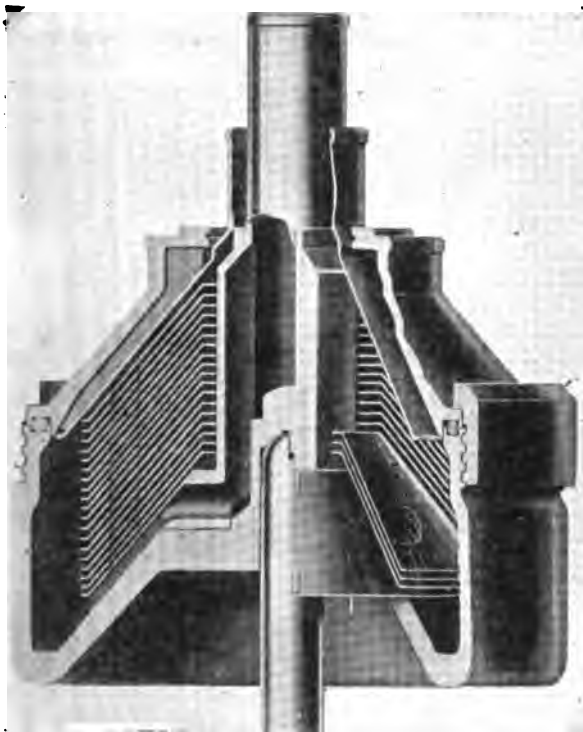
SEC. 8.—Sectional view of De Laval oil purifier bowl.
